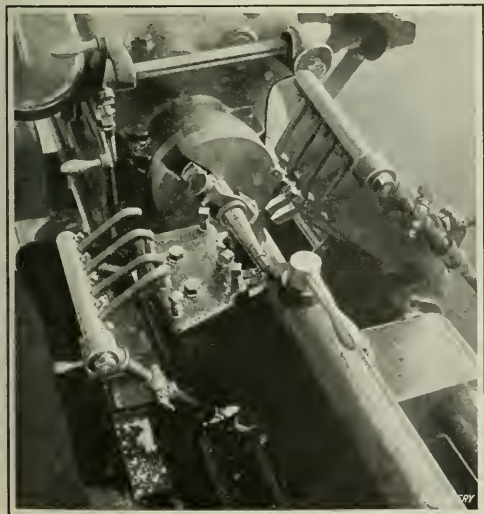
Automatic Lathe furnished with Necessary Tooling for the machining of a Steering Knuckle
